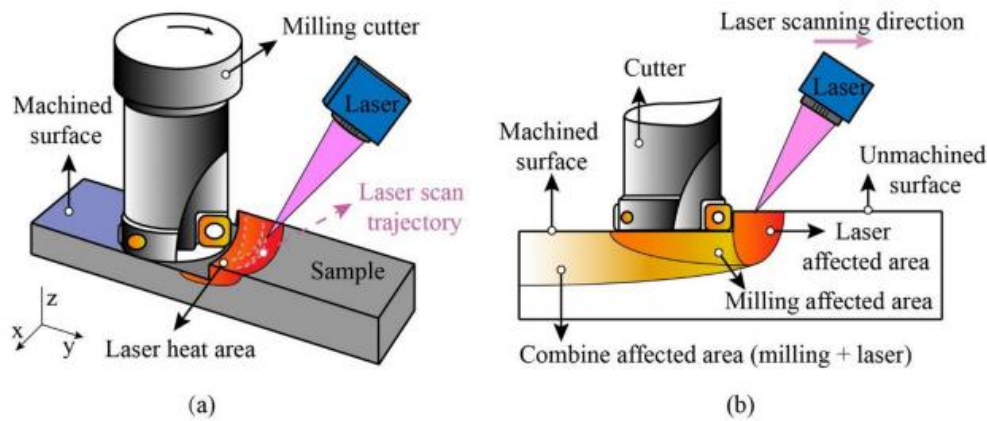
Schematic and equipment of LAM: (a) Laser scanning trajectory for evenly 3D heating the workpiece and (b) heat influenced superficial layer [3].
